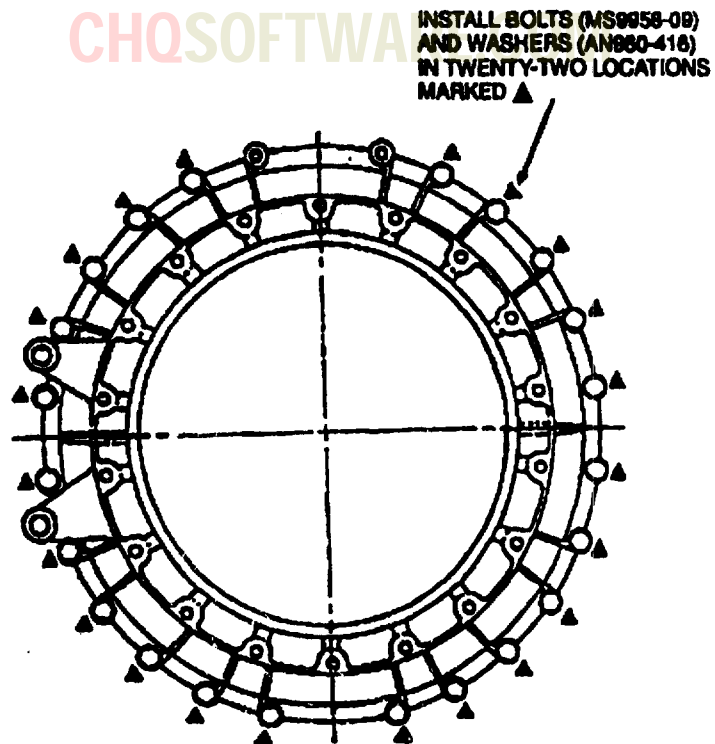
Impeller Housing Bolt Locations (Magnesium) (1-100-090-13) (Sheet 1 of 2).
